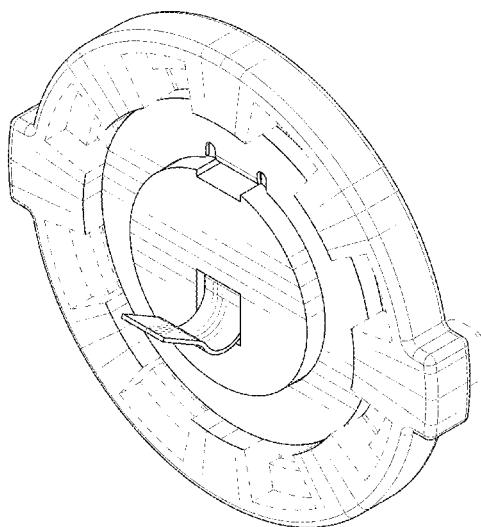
is a back view of the perforating gun contact ring of FIG. 1.
